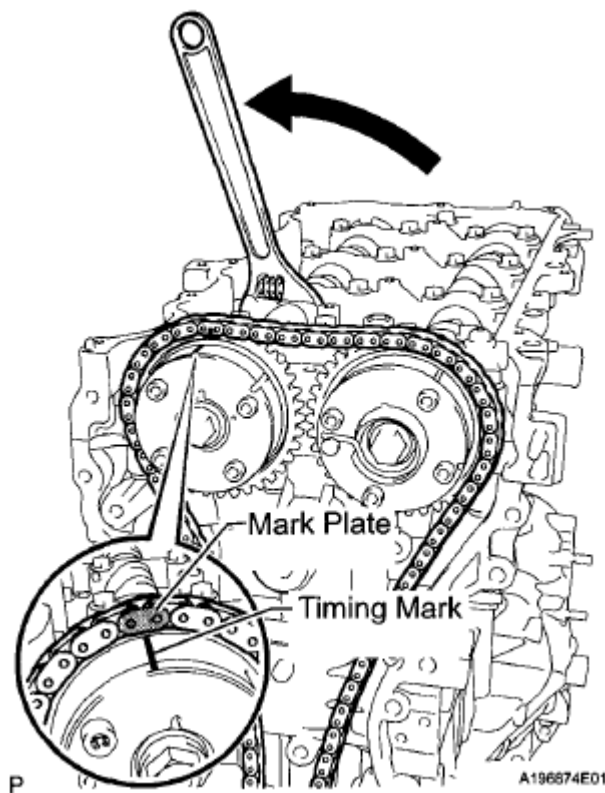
Aligning Timing Mark Of Camshaft Timing Gear With Mark Plate (Yellow Or Gold) Of Chain
